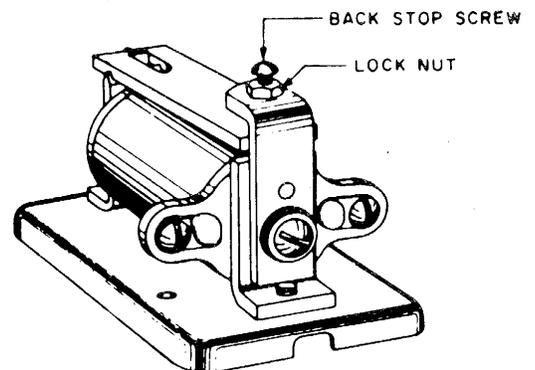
4-Type Buzzer (4B buzzer illustrated)
